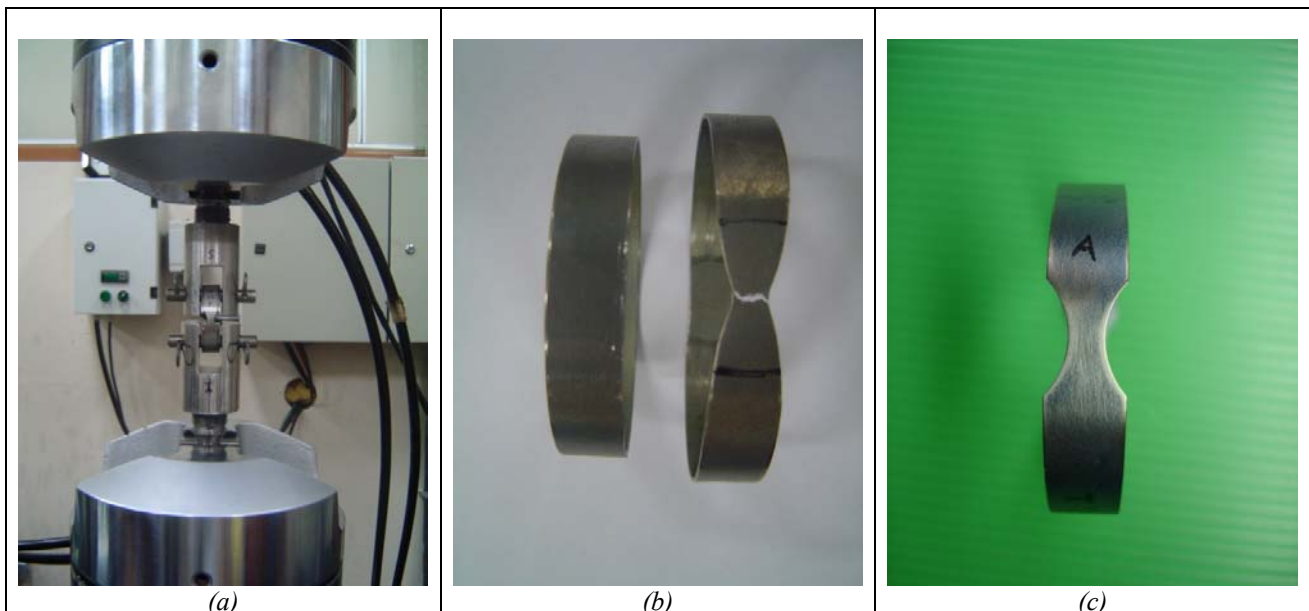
Mechanical tests: (a) test rig; (b) untested and tested tensile specimens; (c) fatigue specimen
